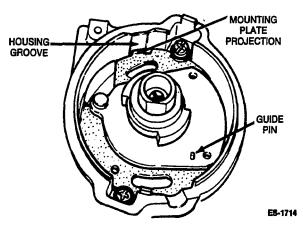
MOUNTING PLATE INSTALLATION
